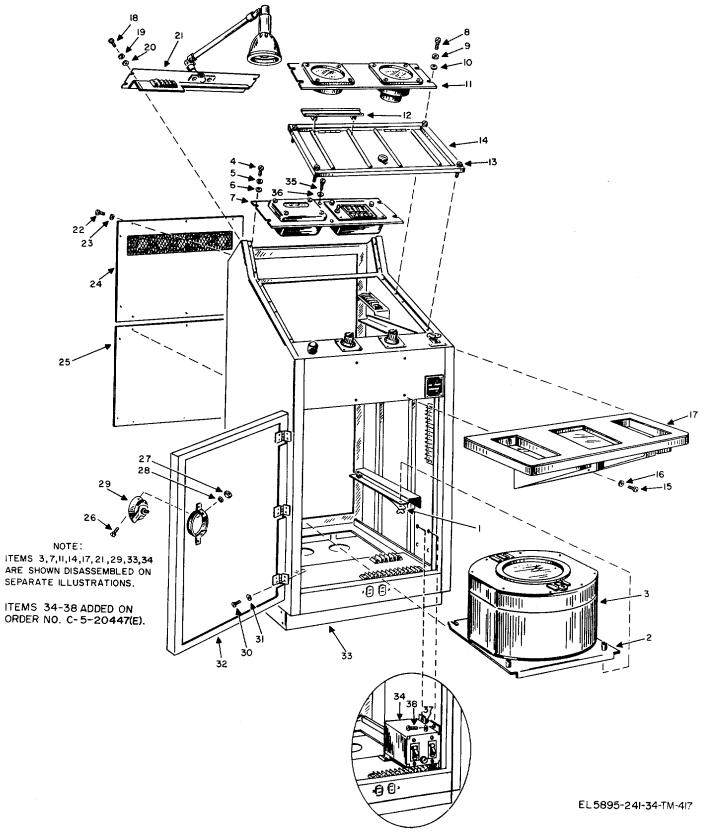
Meteorological Display Consoles OA-2055/FSW-8 and OA-2055A/FS W-8, exploded view-Continued
